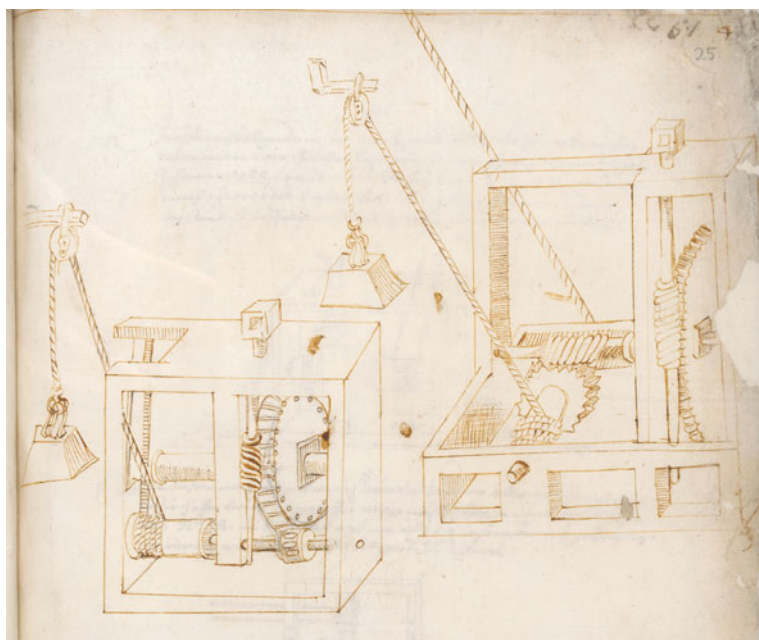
Machine to lift weights constituted of a crank handle, a screw, a wheel, an axle, a pulley and a lantern (Galilei 1592–1593a, 51)
